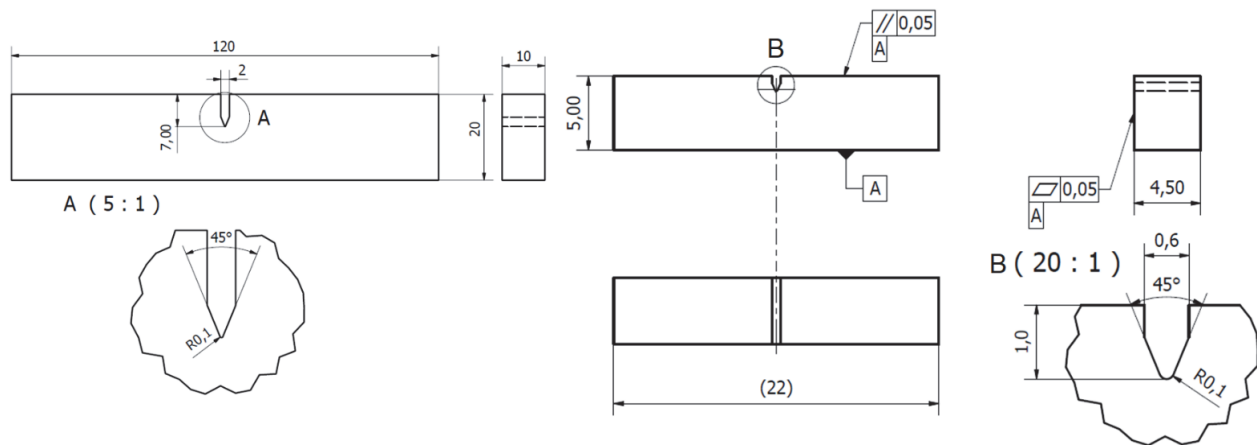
Dimensions of standard (left) and mini (right) SENB test specimens.
